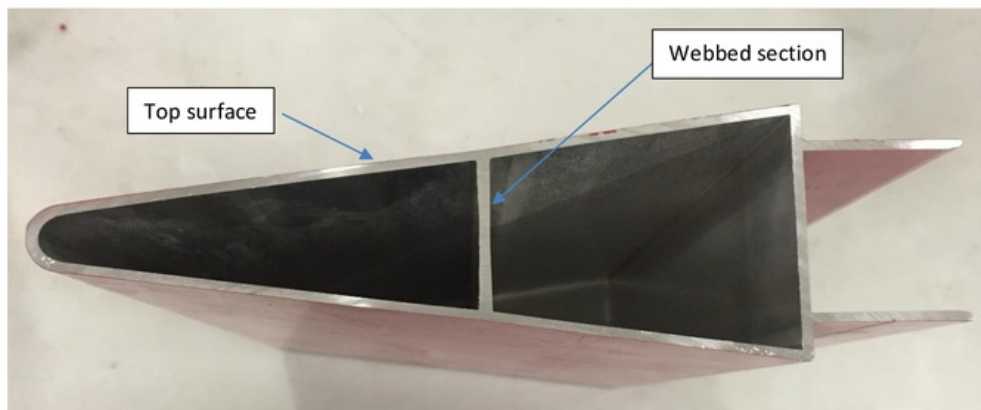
Cross section of the aluminum extrusion webbed specimen
